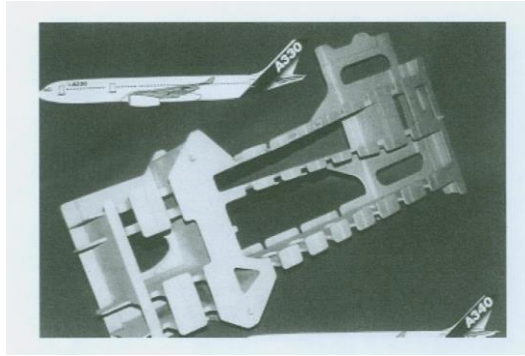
Thixoformed A356.0-T6 inner turbo frame for the Airbus family of aircraft [7]
